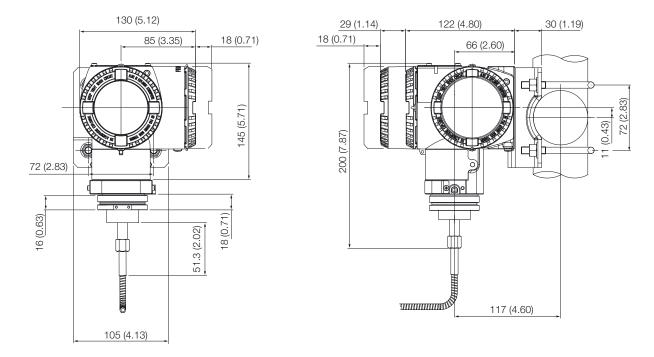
266HRH, 266NRH with DIN housing and remote seal(s) on bracket for vertical or horizontal 60 mm. (2 in.) pipe sensors F, H, M, P, Q, S, W
